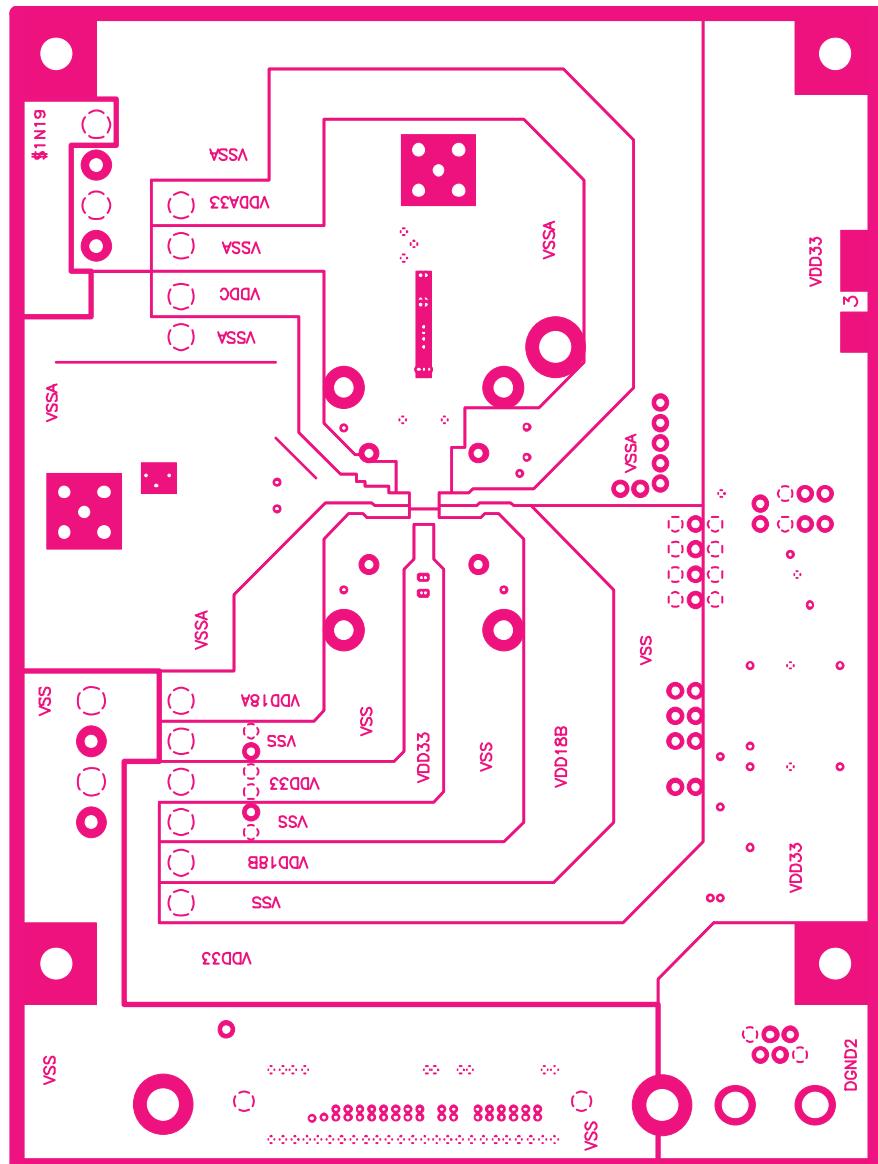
PCB Layout Layer 1, AD973x Evaluation Board, Rev. F
